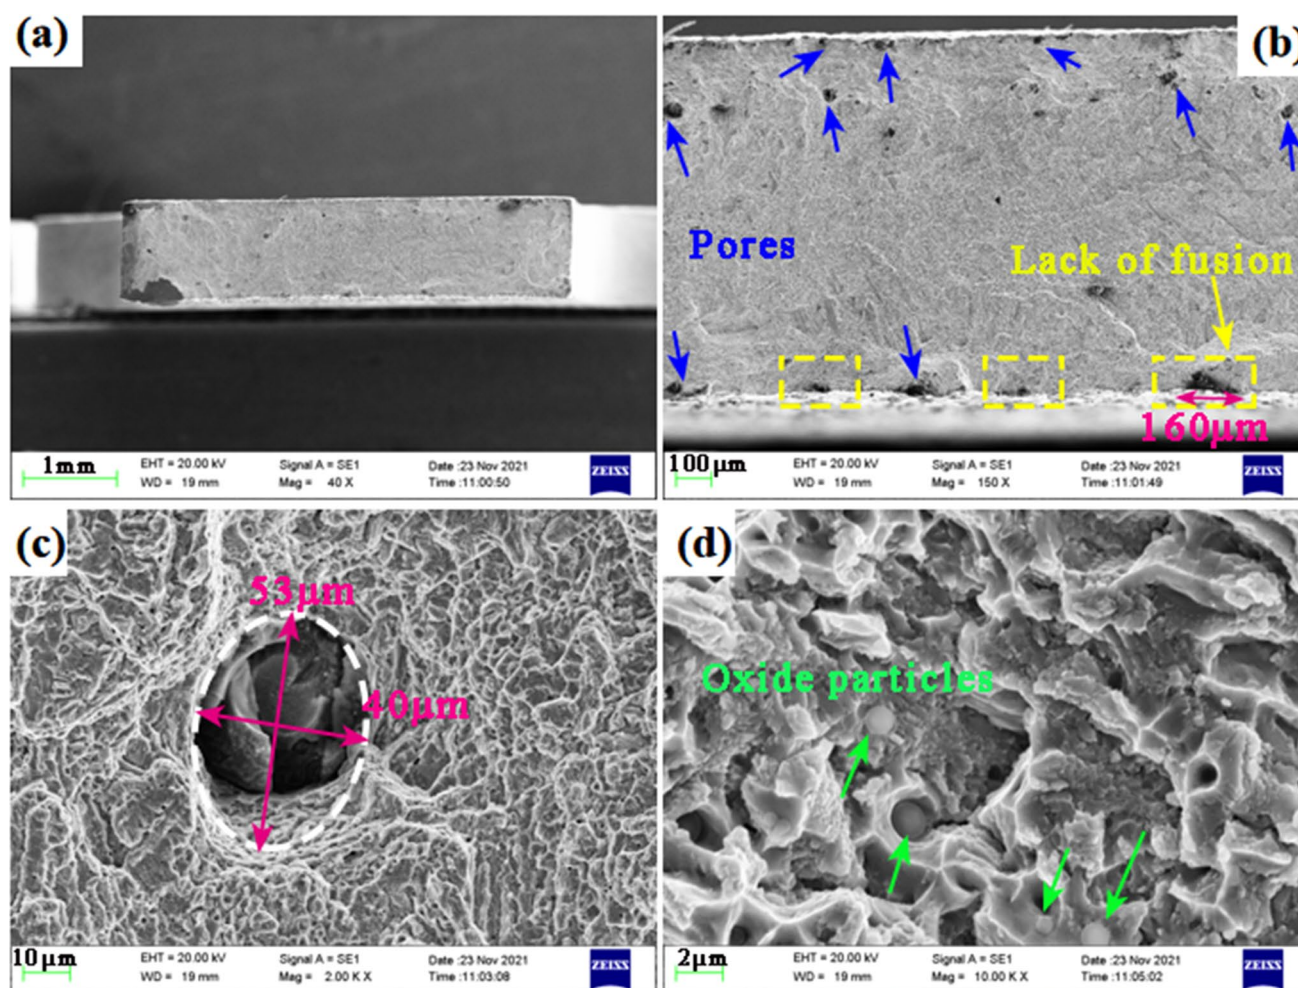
Represented fracture surface of sample ‘S0.5–1’ ( $\epsilon_f = 12.9\%$ ). a Macroscopic fracture morphology, b, c are enlarged images showing the pore defects, d a high magnified image revealing the dimple fracture and oxide particles
